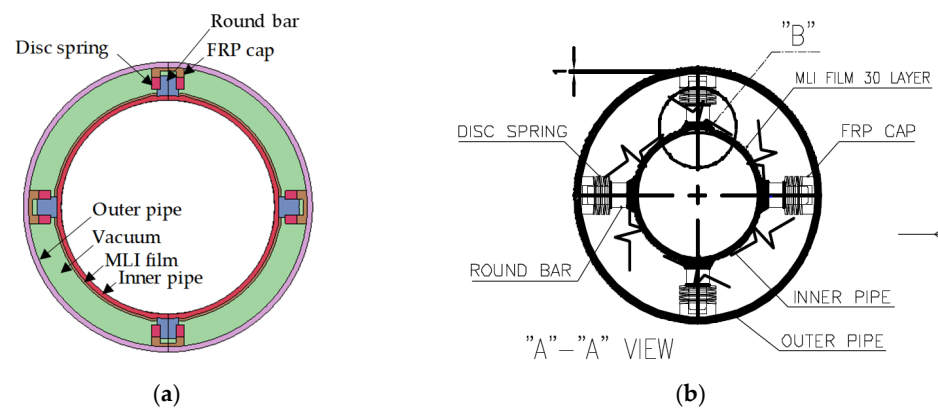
Multi-layer vacuum-insulated pipe (MVIP); (a) Typical cross-section of an MVIP; (b) Detail of a supporting member.
